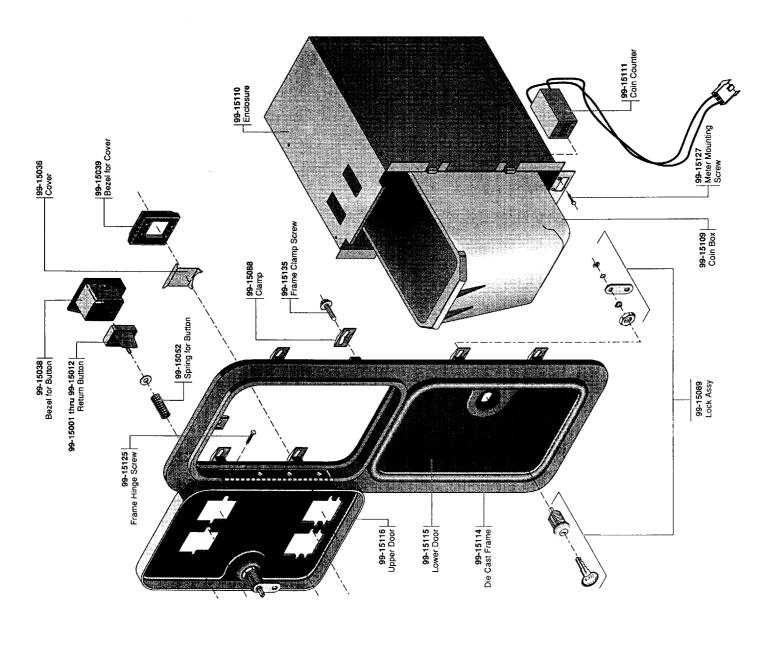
Coin Controls, Inc. Coin Door Assembly 171093-001
